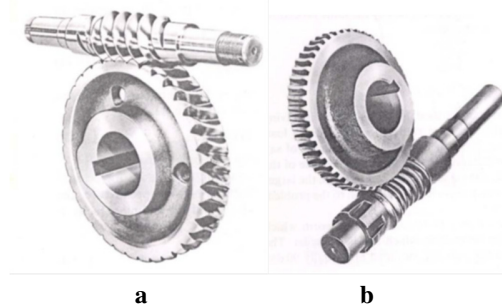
“(a) Single enveloping worm gear; (b) Double enveloping worm gear.”
